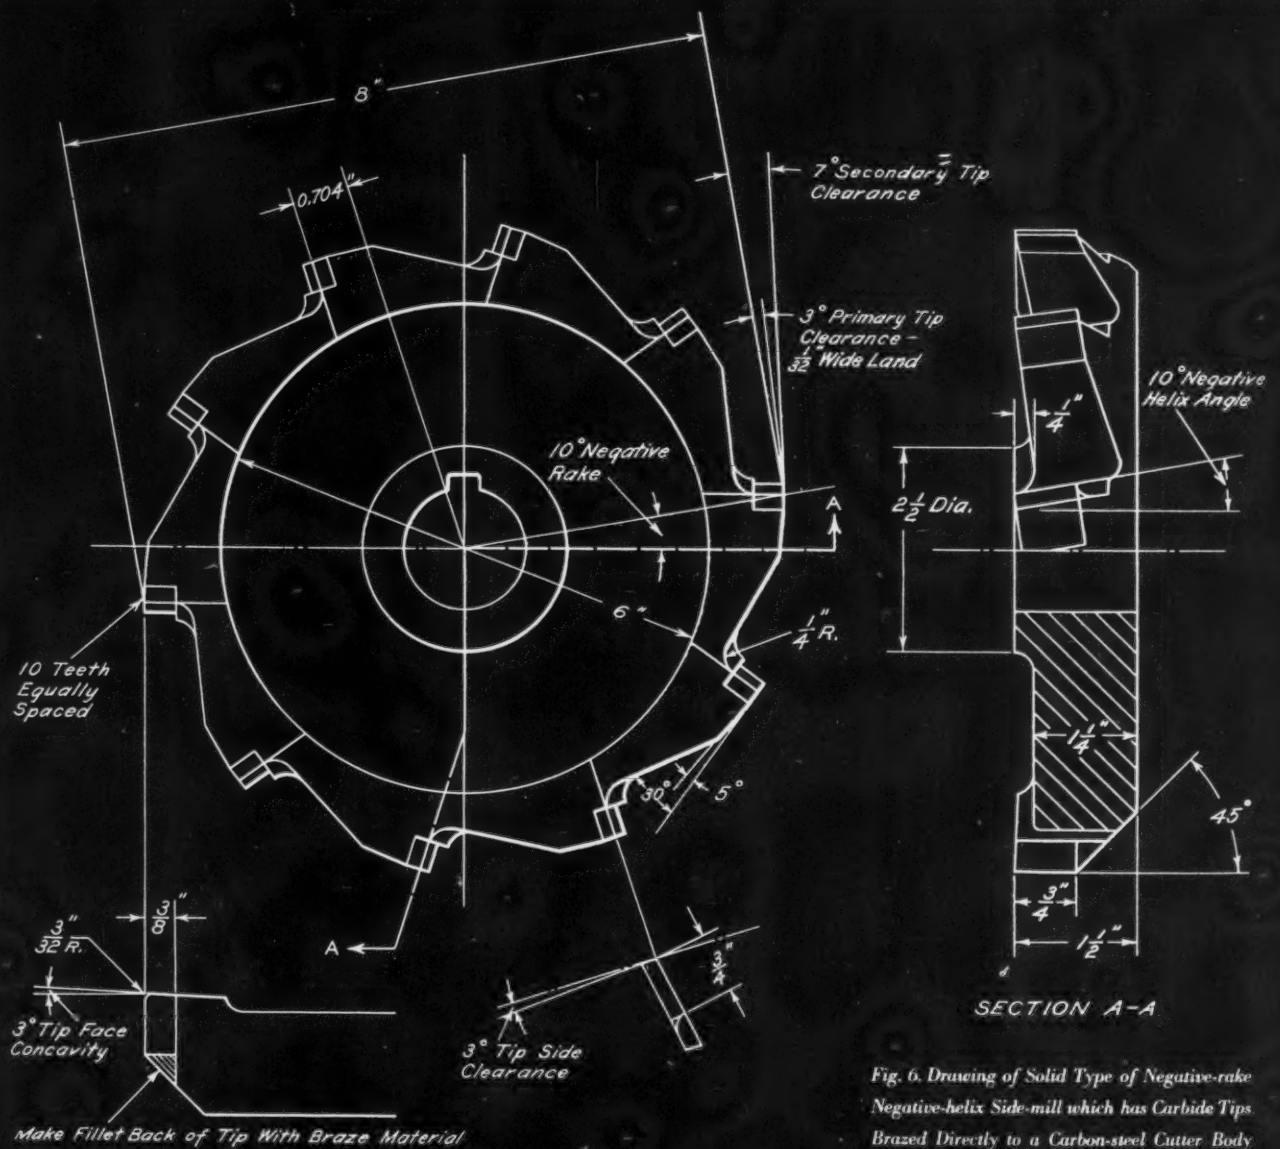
Drawing of Solid Type of Negative-rake Negative-helix Side-mill which has Carbide Tips. Brazed Directly to a Carbon-steel Cutter Body
